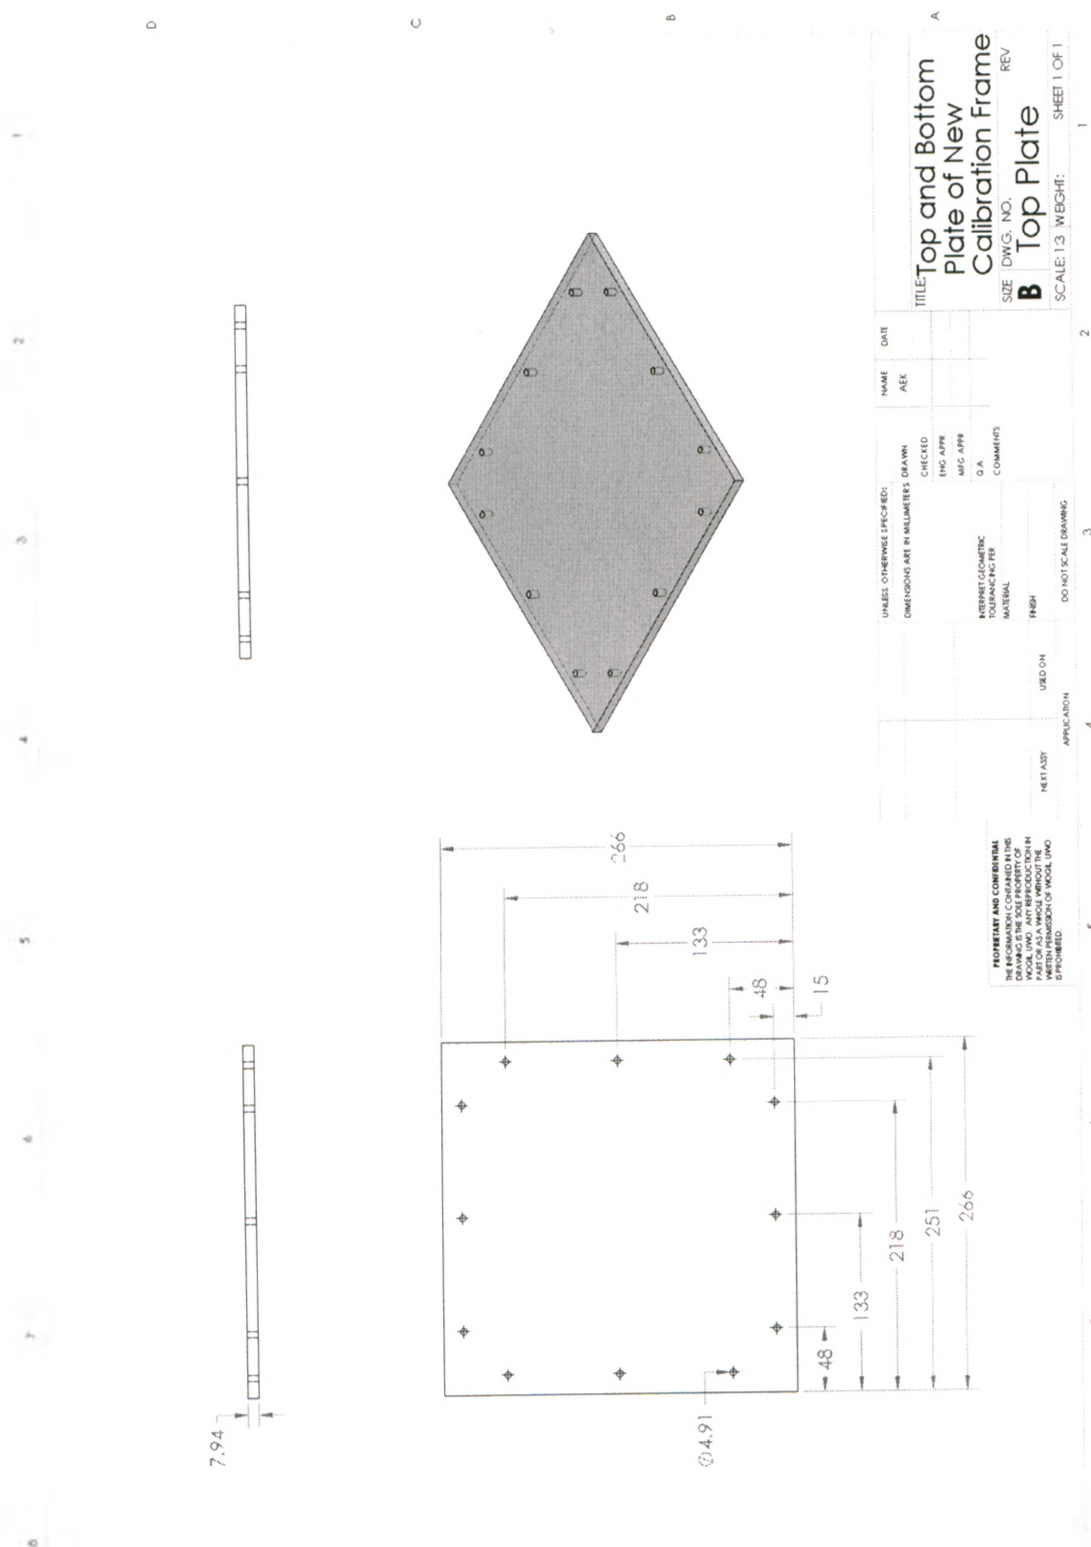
Schematic drawing of the top and bottom plate – small frame
